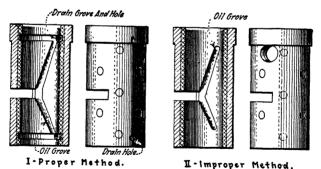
Illustrating the proper and improper methods of cutting oil grooves in bearings.
